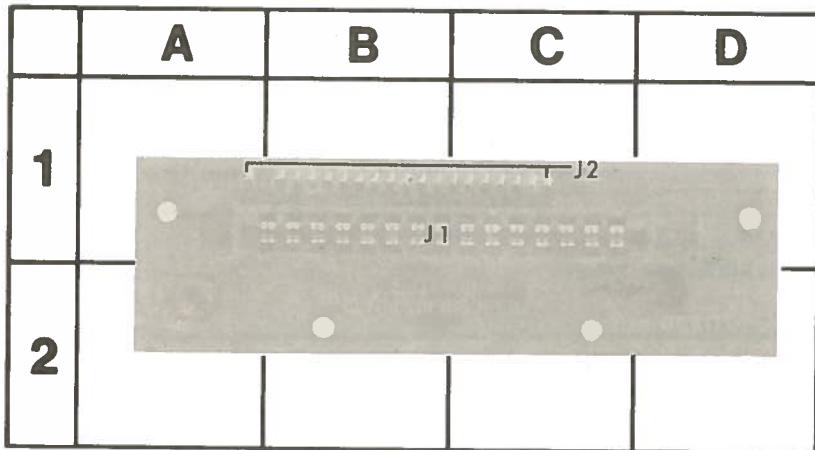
IEEE INTERCONNECT PCB ASSEMBLY
